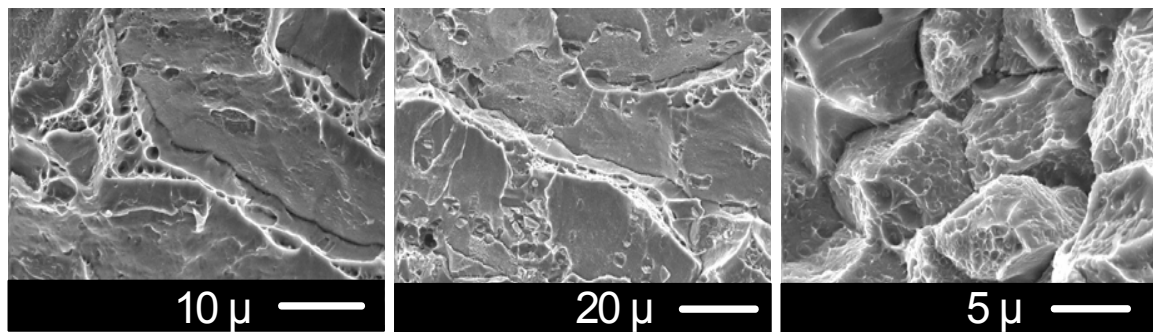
Fracture surface of the parent metal, the weld and the samples exposed to the torch treatment for 2 minutes and water quenched.
